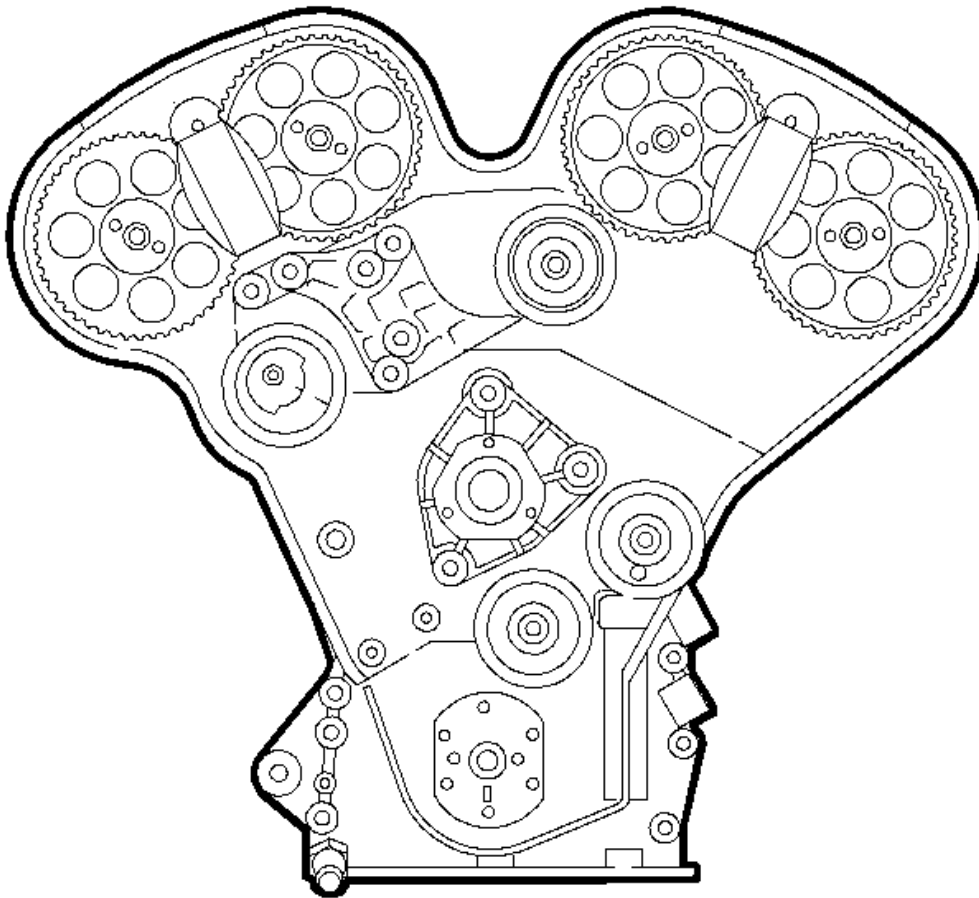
Installation Of Special Tools For Camshaft Drive Sprocket Removal
